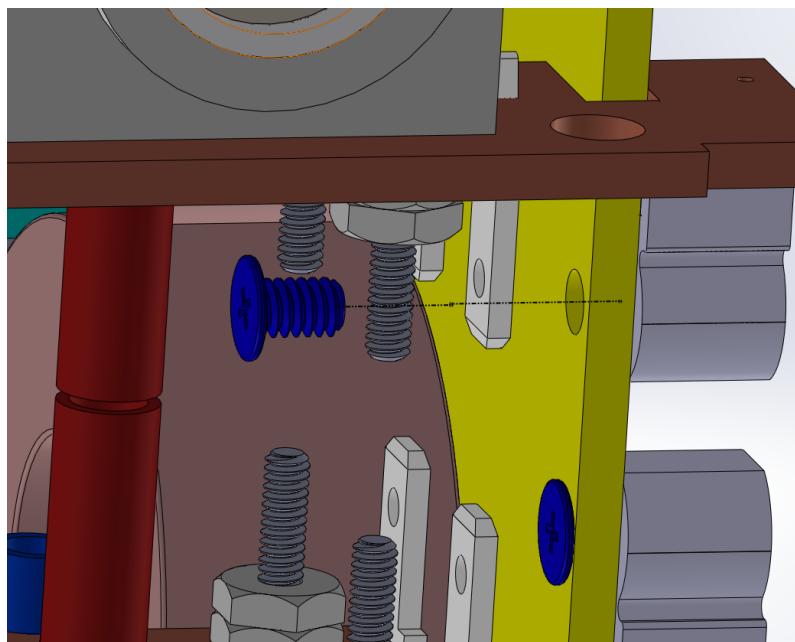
Use ONE M2 Board connection screw to connect the INNER FRONT of BPR to T2. To complete this step, you may need to bend the Wire Harness out of the way.
